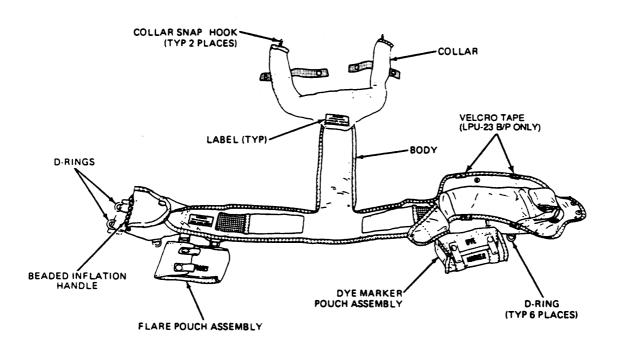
LPU-23/P series life preserver assembly, parts nomenclature.
